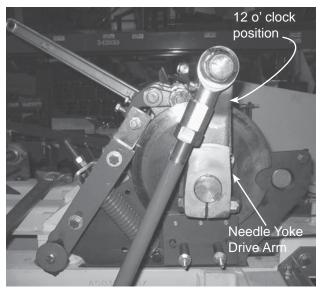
Needle Yoke Arm in 12 o'clock Position Right-Hand Side View
